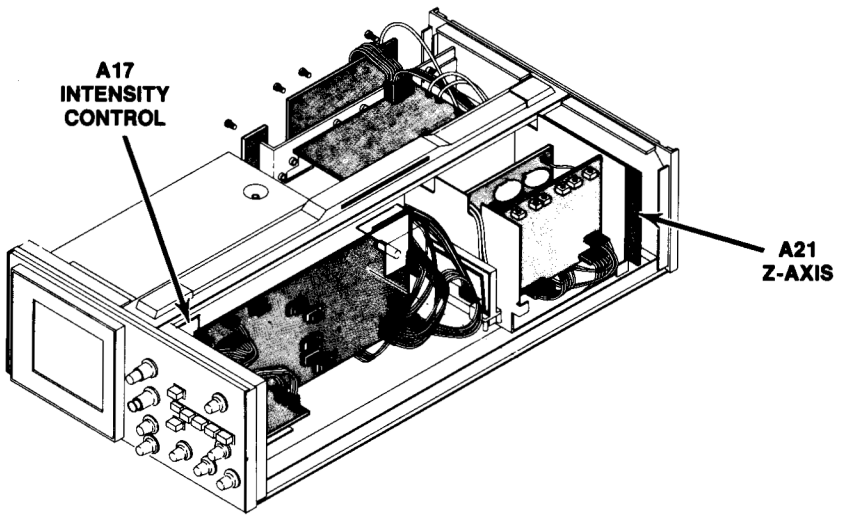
A21-Z-axis Circuit Board Assembly.
